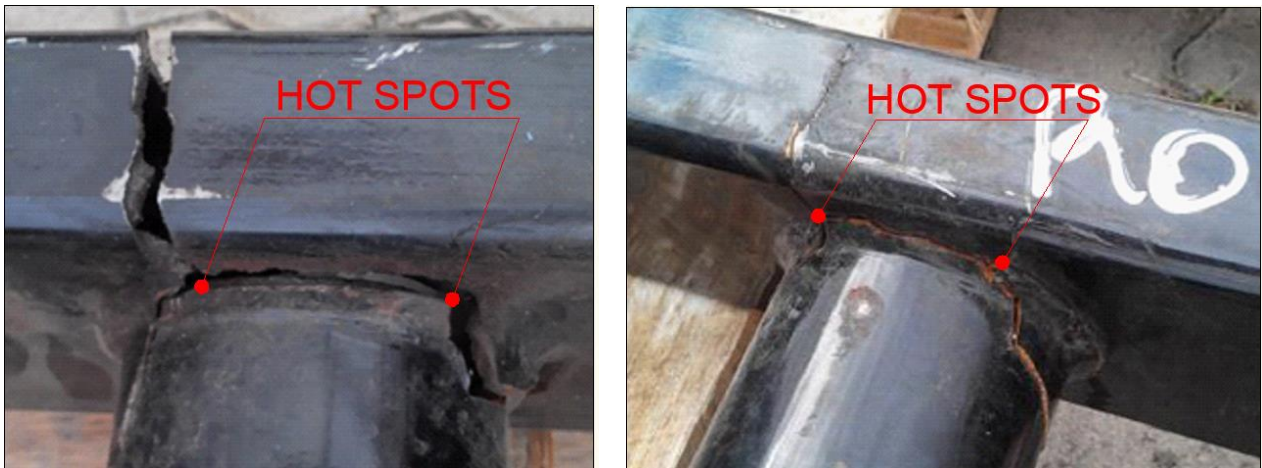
Typical examples of fatigue failure in the H component. The experimental hot spots are highlighted.
